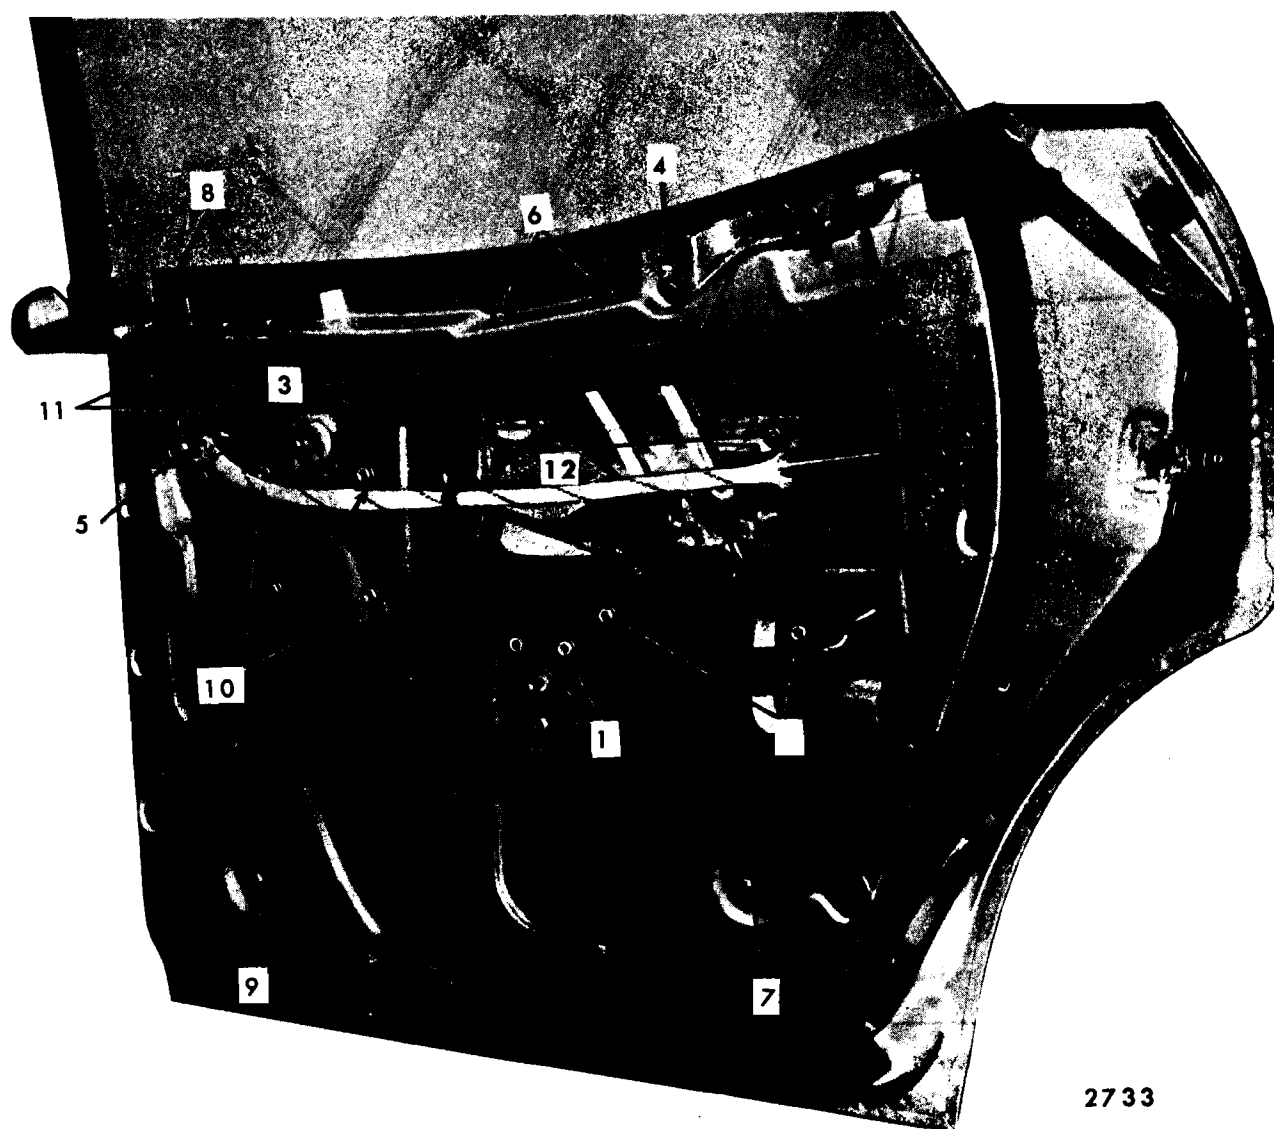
Rear Door Hardware - "A-39" Styles
